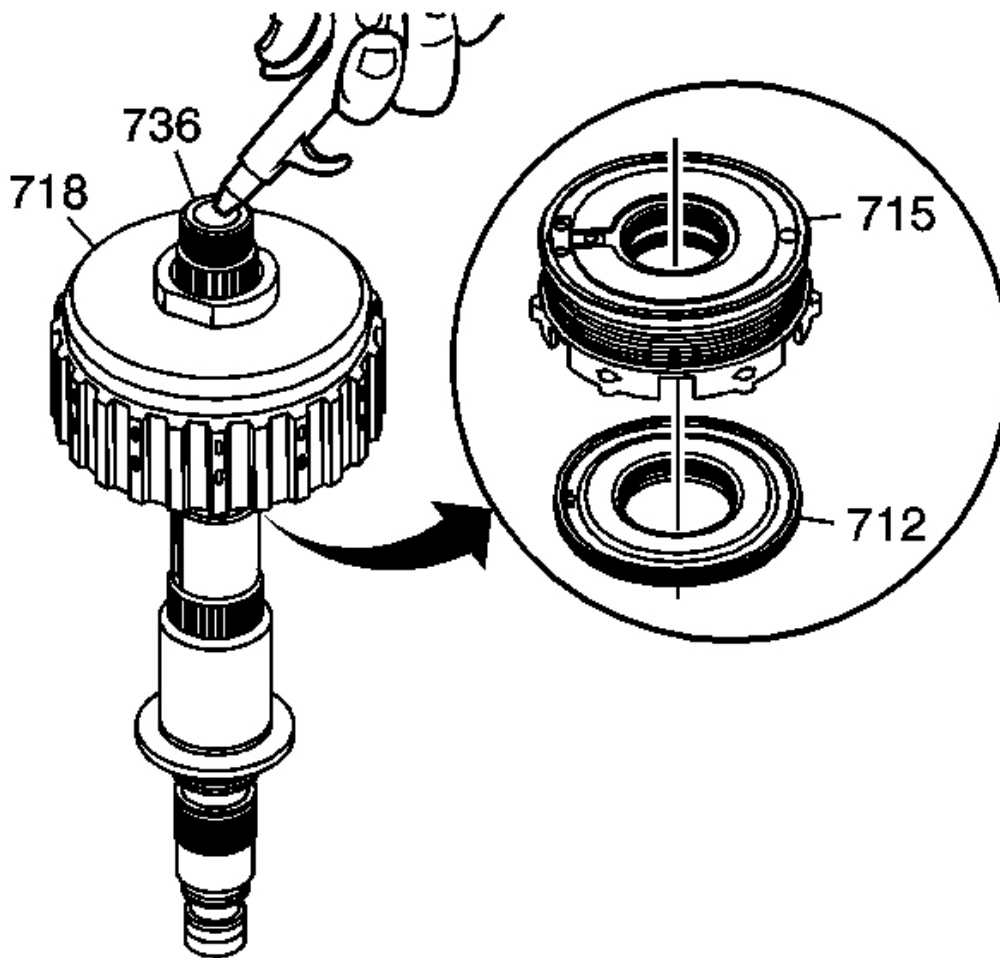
Applying Compressed Air Into Center Fluid Passage Hole Of 1st & 2nd Clutch Shaft
